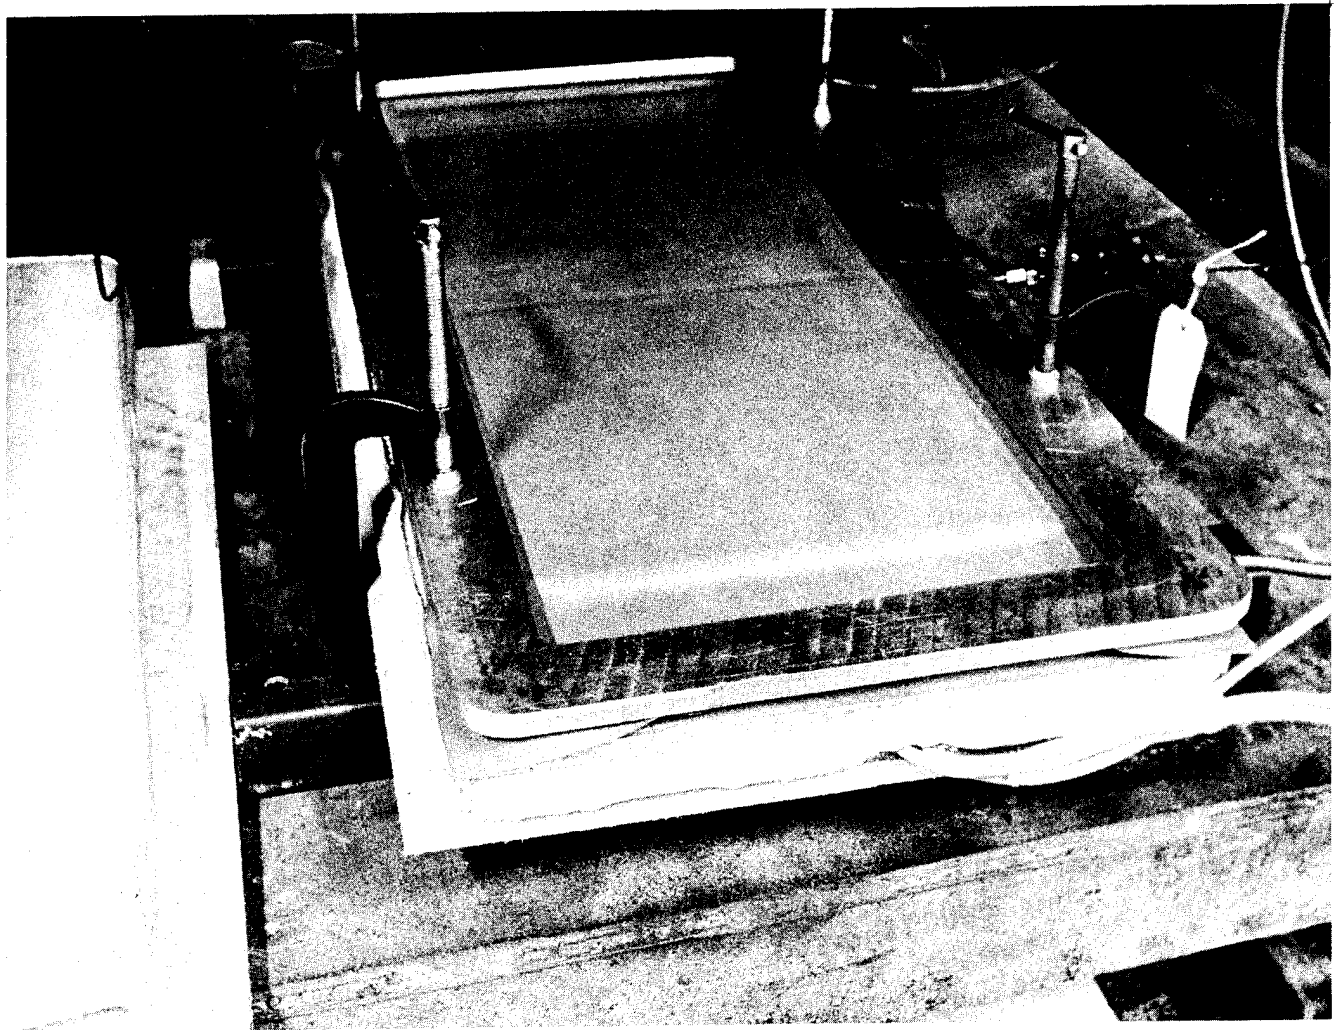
Locally Heated Autoclave Bag Assembly with Clamping Frame in Place and Vacuum Drawn.
